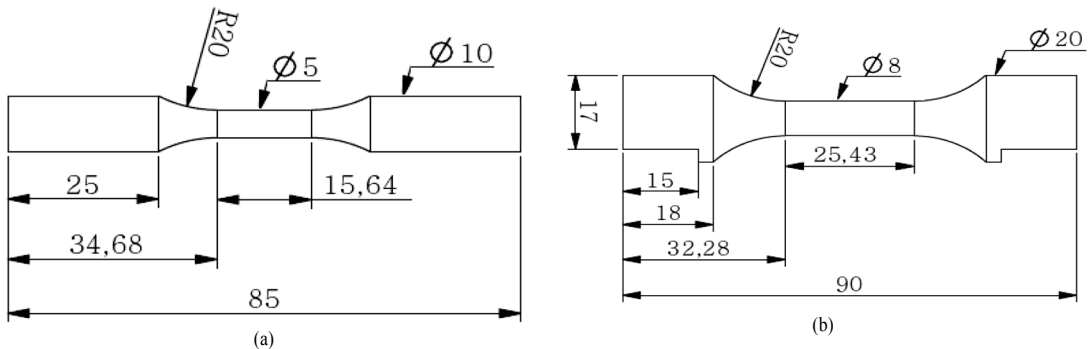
Specimen configuration for (a) uniaxial and (b) torsional fatigue specimens.
